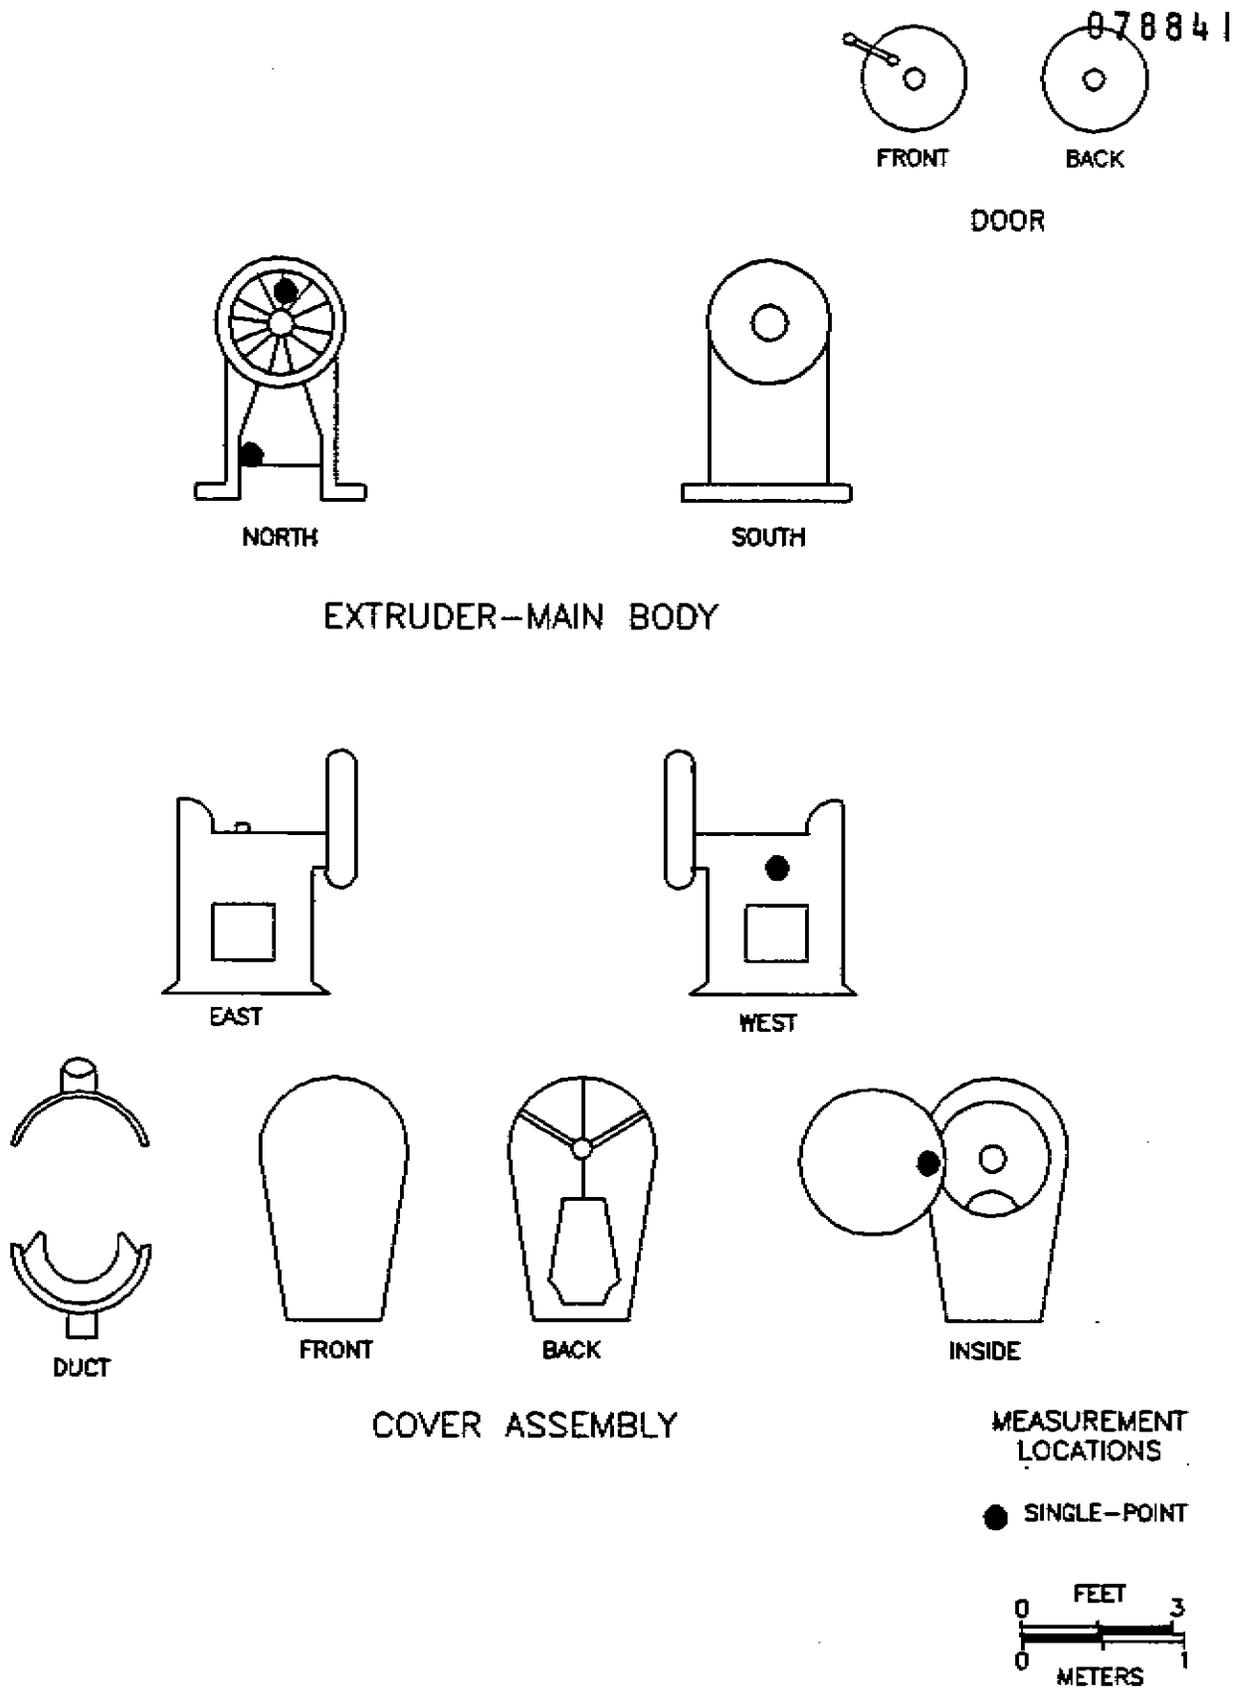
Building 30, Fabrication Room, Extruder #38347, Indicating Measurement Locations
